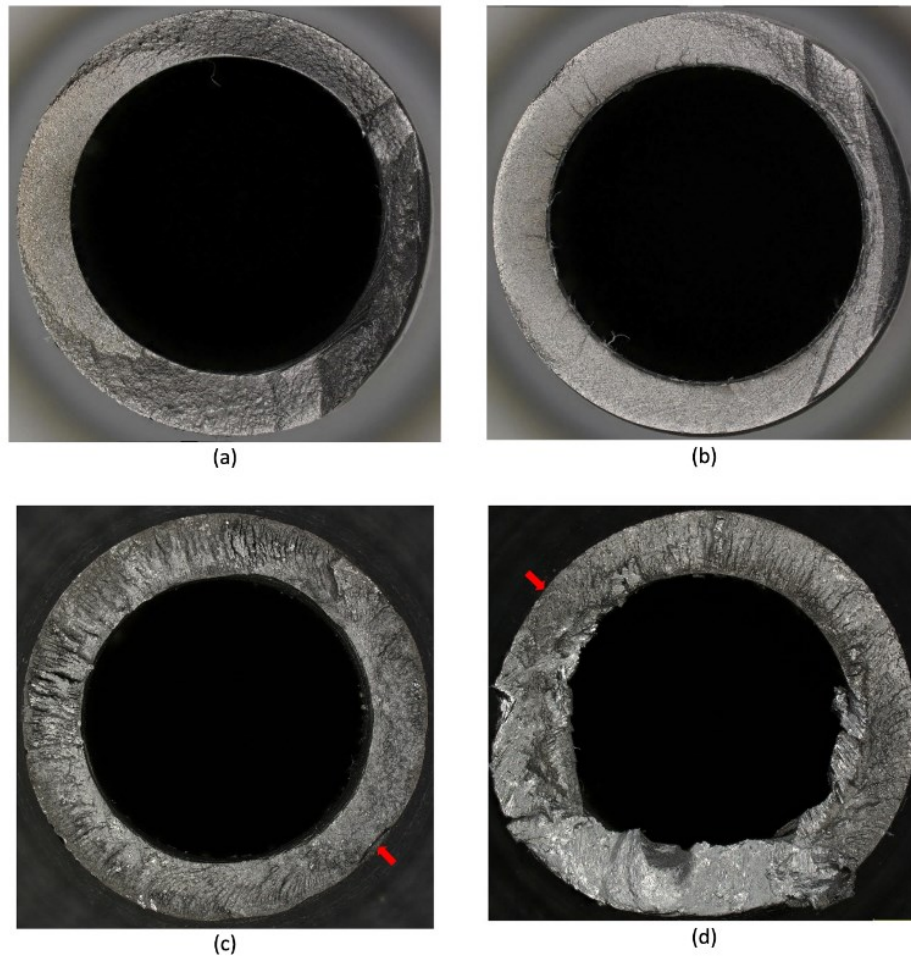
Fracture surfaces of unnotched specimens involved in this experimental work [11]. Push-pull tests: (a) $N_f = 772\,578$, (b) $N_f = 194\,250$. Torsion tests: (c) $N_f = 1\,056\,430$, (d) $N_f = 2\,703\,030$.
